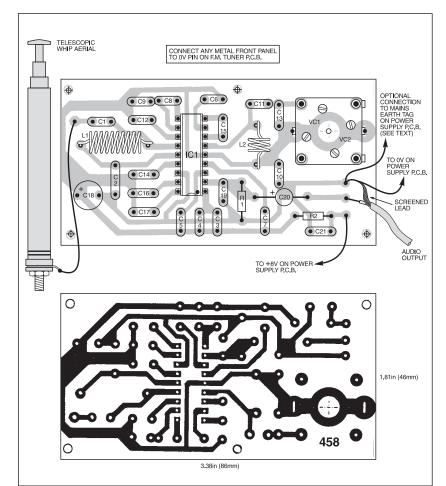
F.M. Tuner printed circuit board component layout, wiring details and full-size copper foil master pattern.
